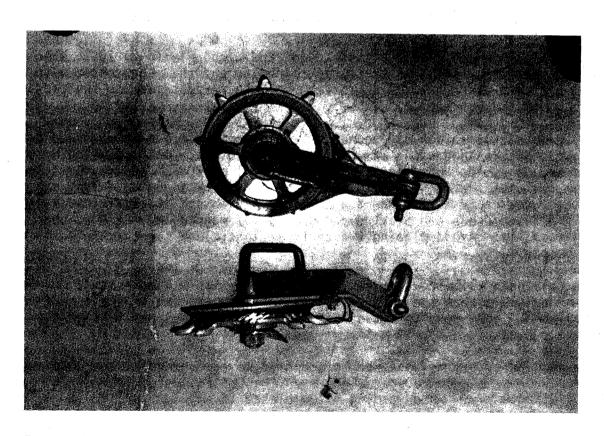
The modified zig-zag block. The eye on top of the block arm was welded on by a local welder.
